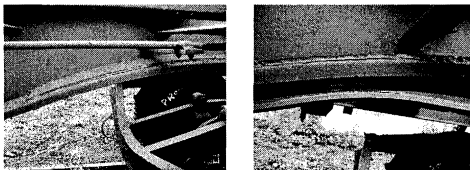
Crack in the middle longitudinal girder on wagon type Regs-z
